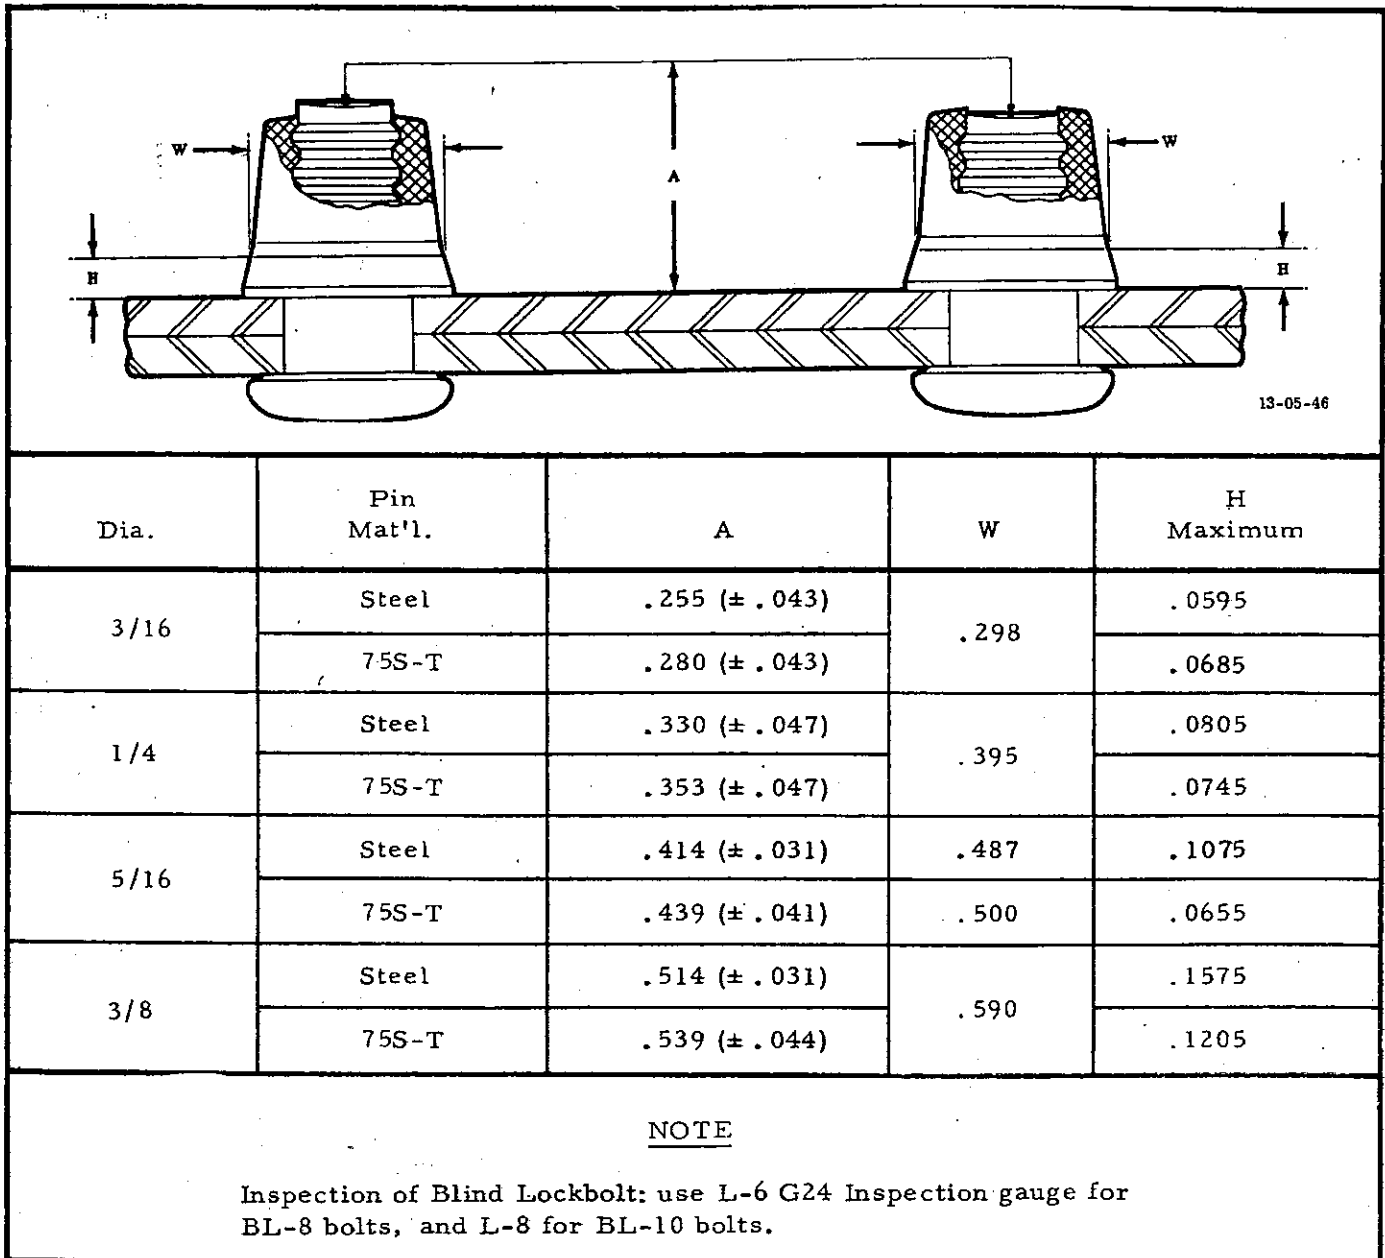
Huck Lockbolt Stump Inspection Dimensions
